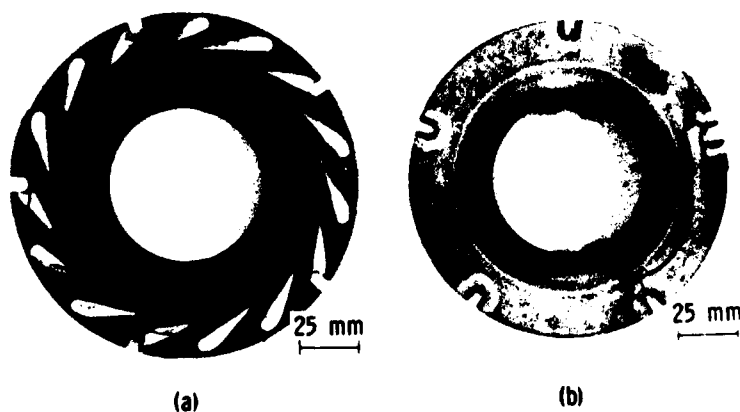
RBSN rear shroud after 50 hours of testing in the 10-kW turbo alternator with (a) front view and (b) rear view. Arrows indicate regions where fracture originated.
